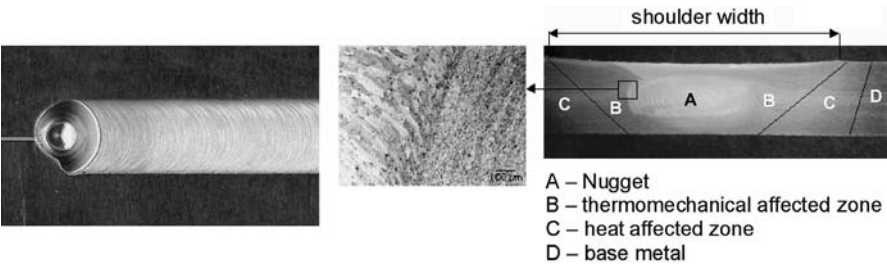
Typical FSW weld seam (left) and microsection (middle and right) [26]
